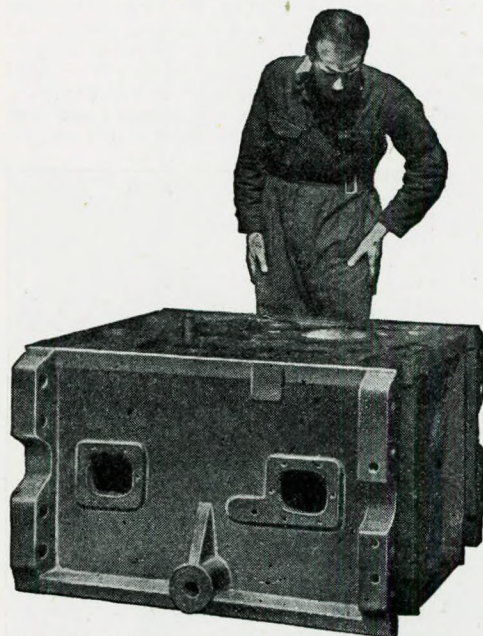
The same cylinder cover, perfectly repaired by scientific welding and as sound as ever, ready for return to the ship. In addition to the cracks being repaired, the holes drilled when a patch was fitted to make a temporary repair, were also filled up.
